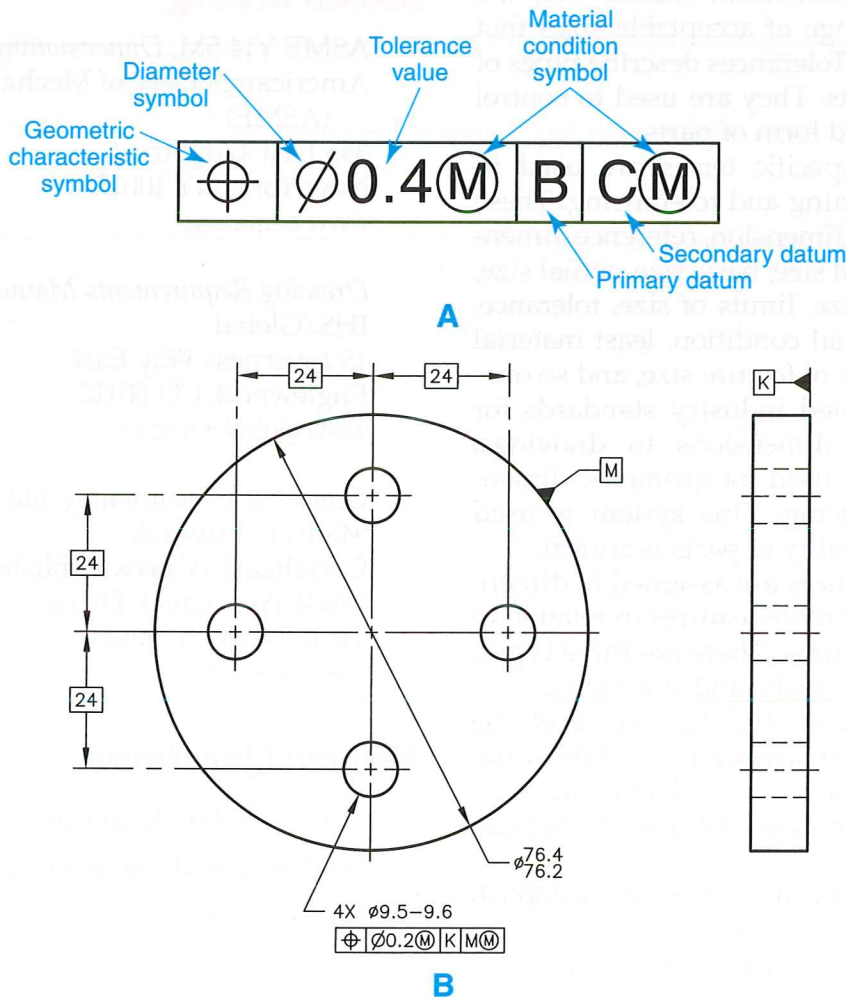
Using CAD commands to create geometric dimensioning and tolerancing symbols. A—A feature control frame created with the Tolerance command. B—A drawing dimensioned with basic dimensions and geometric dimensioning and tolerancing symbols.
